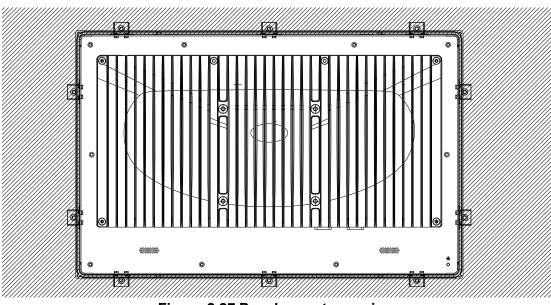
Panel mount rear view (Take PPC-3151SW drawing as example)
